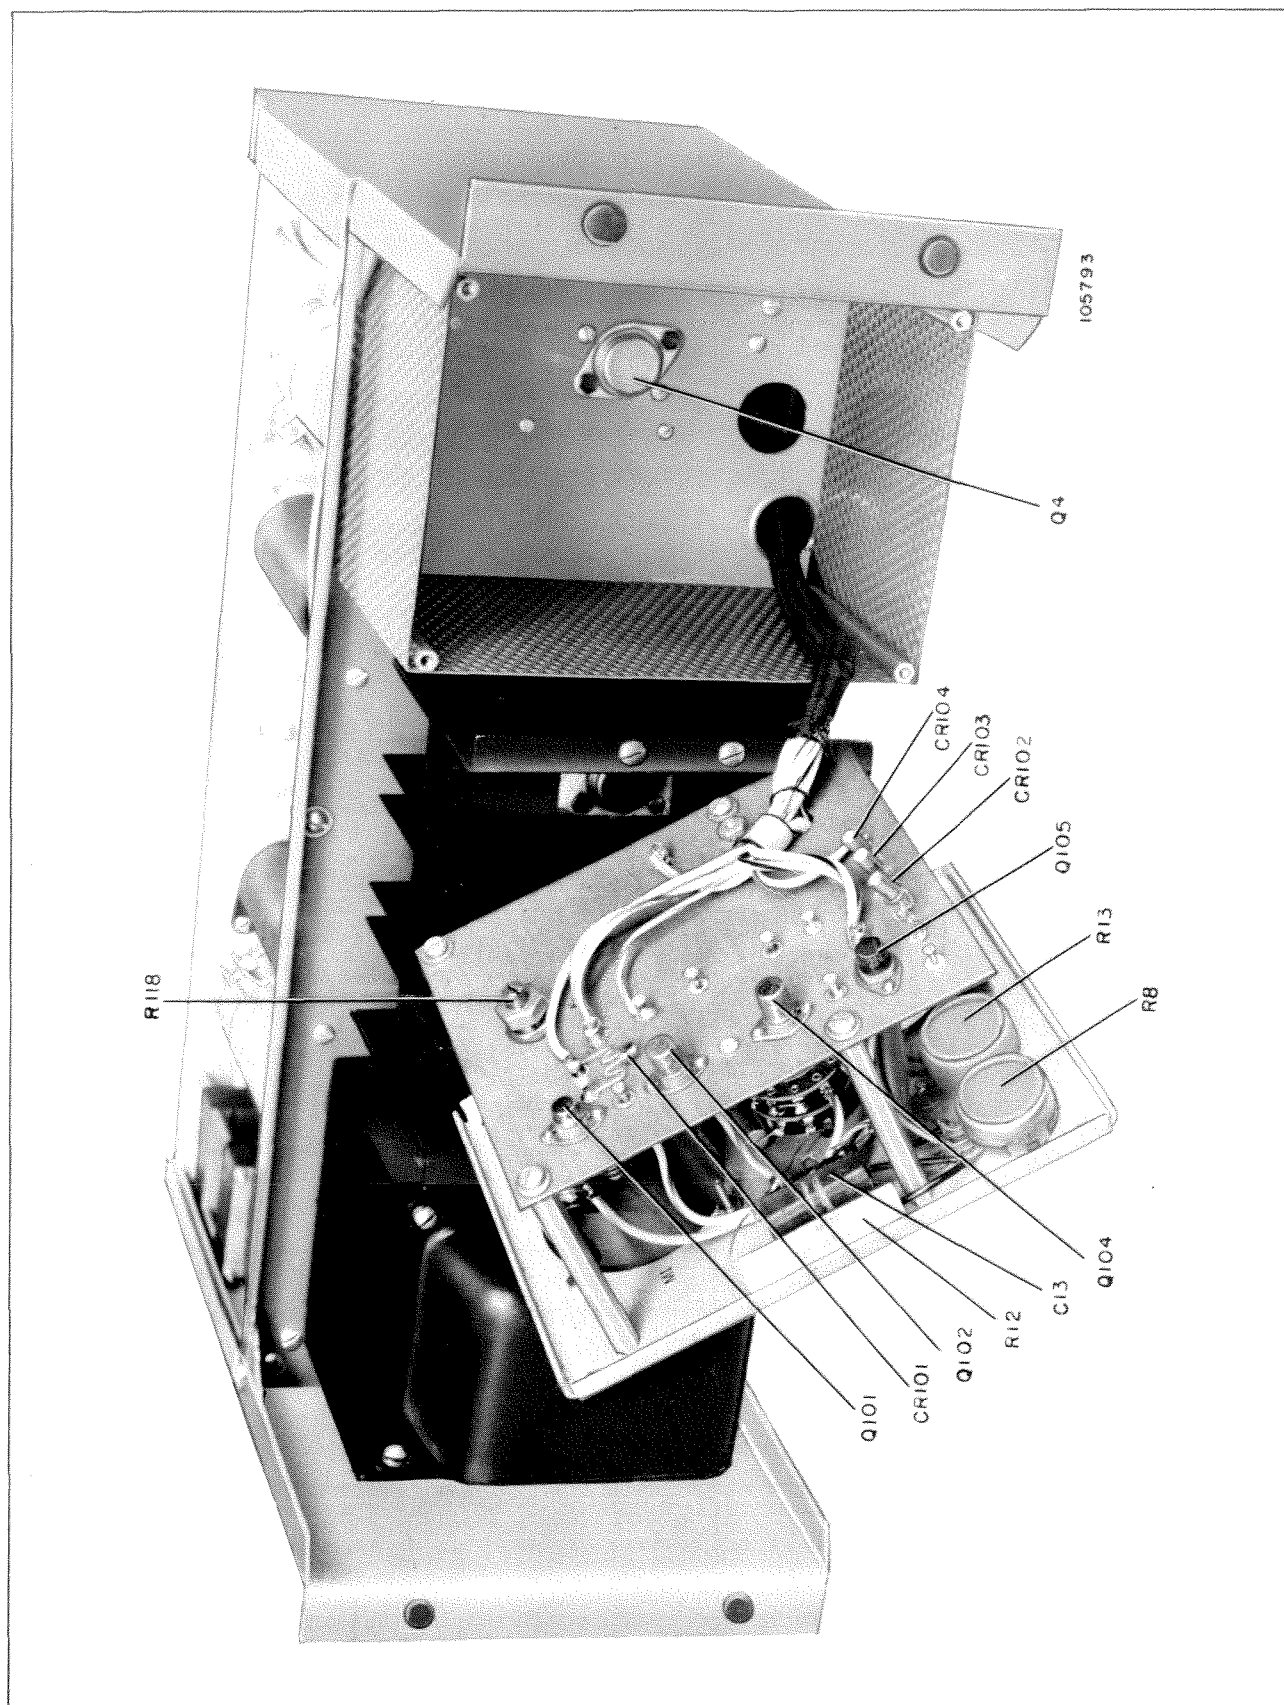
Exposed View of Component Assembly Board and Front Panel
